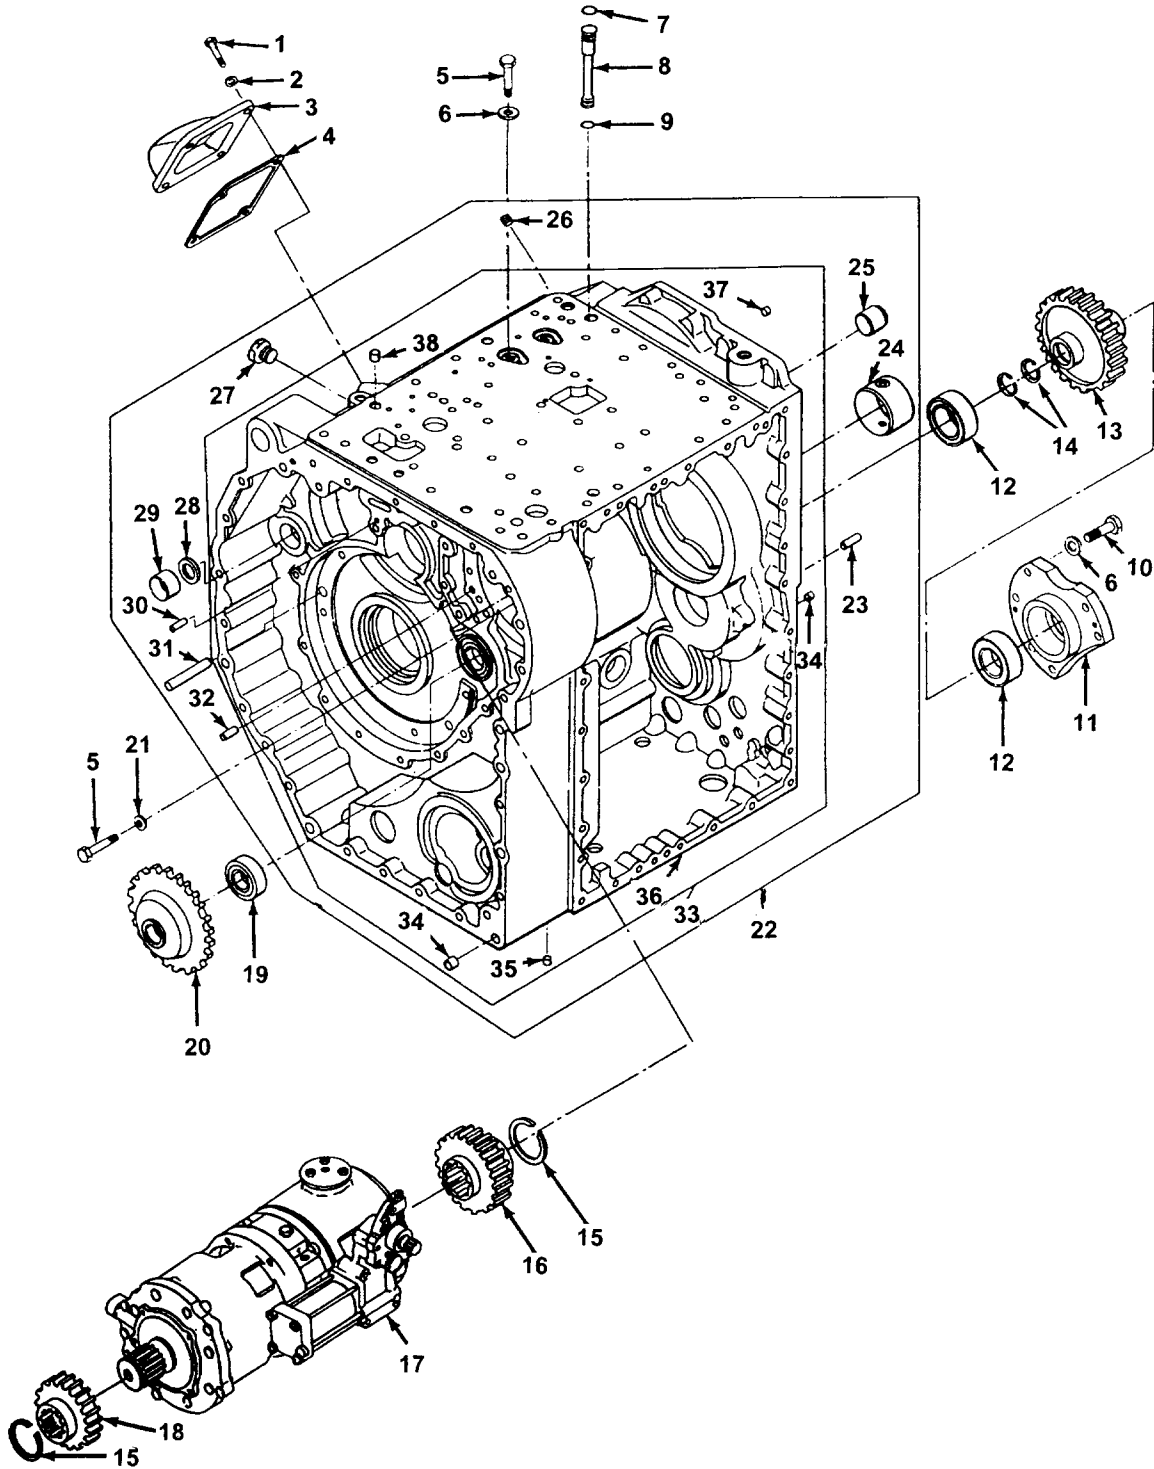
Center Housing and Hydrostatic Pump and Motor.
